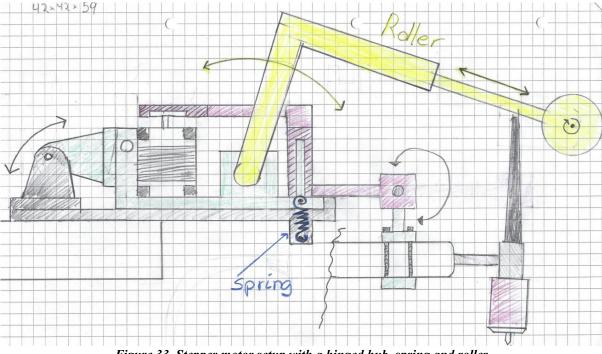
Stepper motor setup with a hinged hub, spring and roller.
